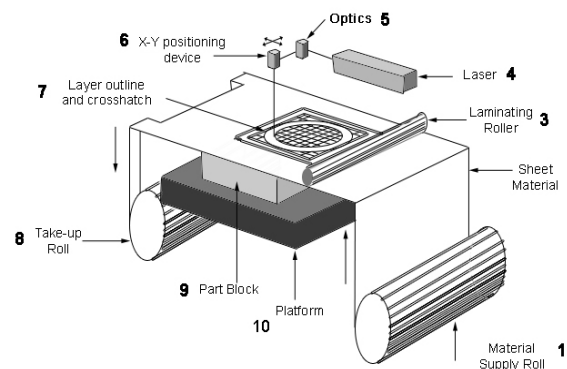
Scheme to achieve prototypes through LOM technology : 1- material supply role; 2 – sheet material; 3 – laminating roller; 4 –laser scanning system; 5 - optics; 6 – positioning device; 7 – layer outline and crosshatch; 8 – take-up roll; 9 – part block; 10 – platform and system with vertical movement.
